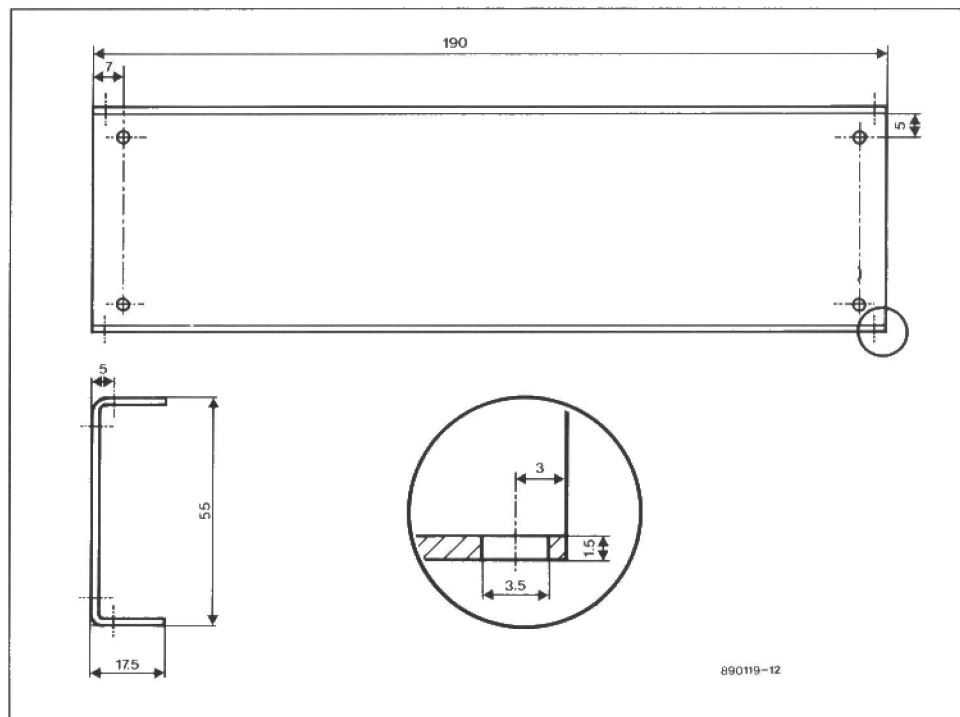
Construction details of the aluminium bracket that holds the PCB.
